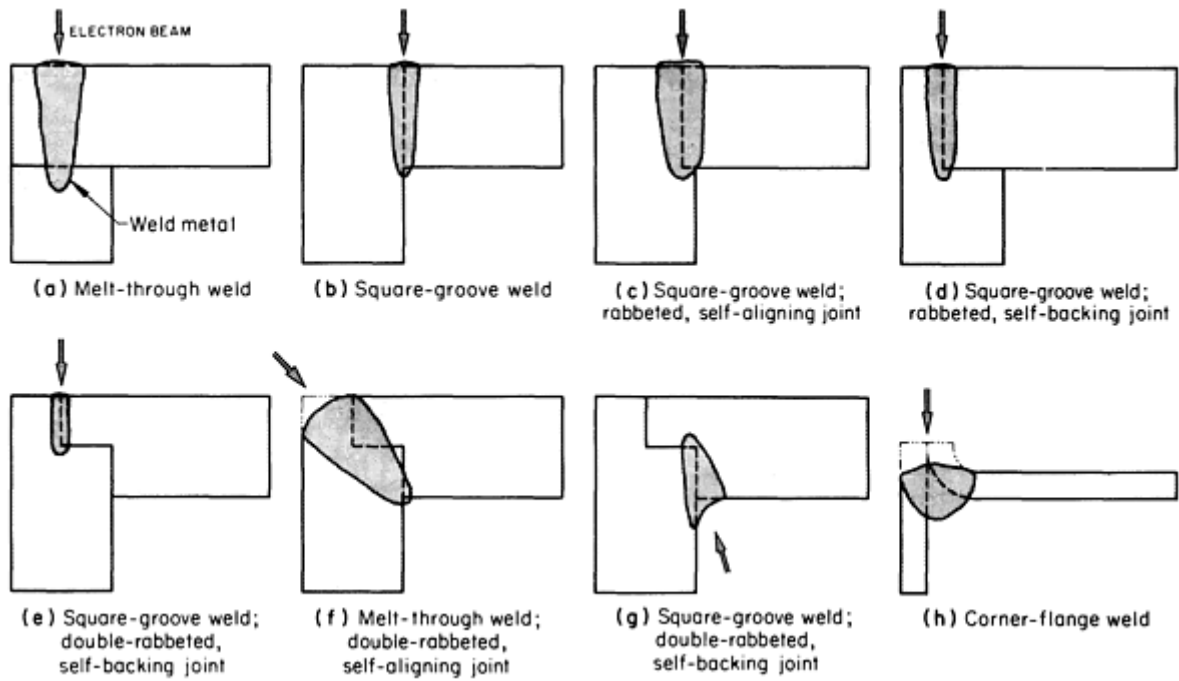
TYPES OF CORNER JOINTS AND WELDS TYPICALLY OBTAINED WITH EBW
